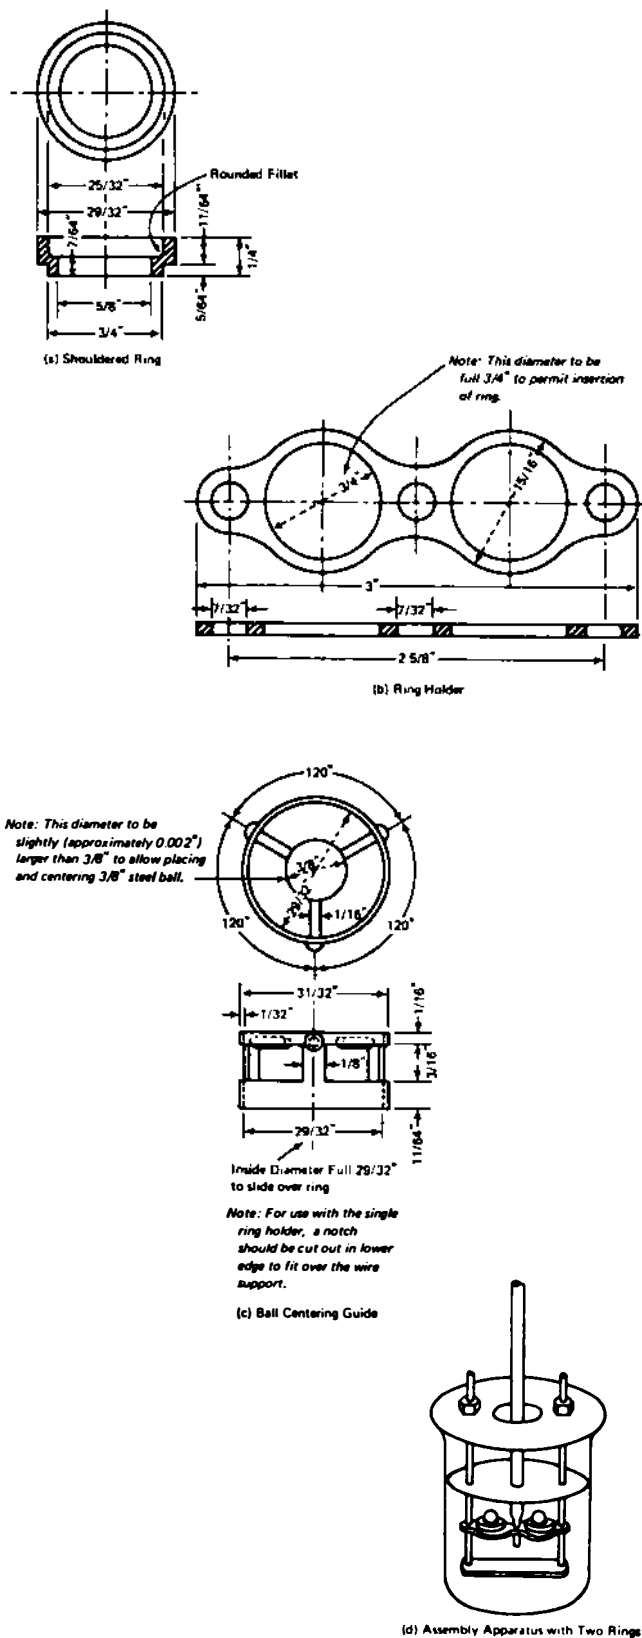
Shouldered Ring, Ring Holder, Ball-Centering Guide, and Assembly of Apparatus Showing Two Rings
